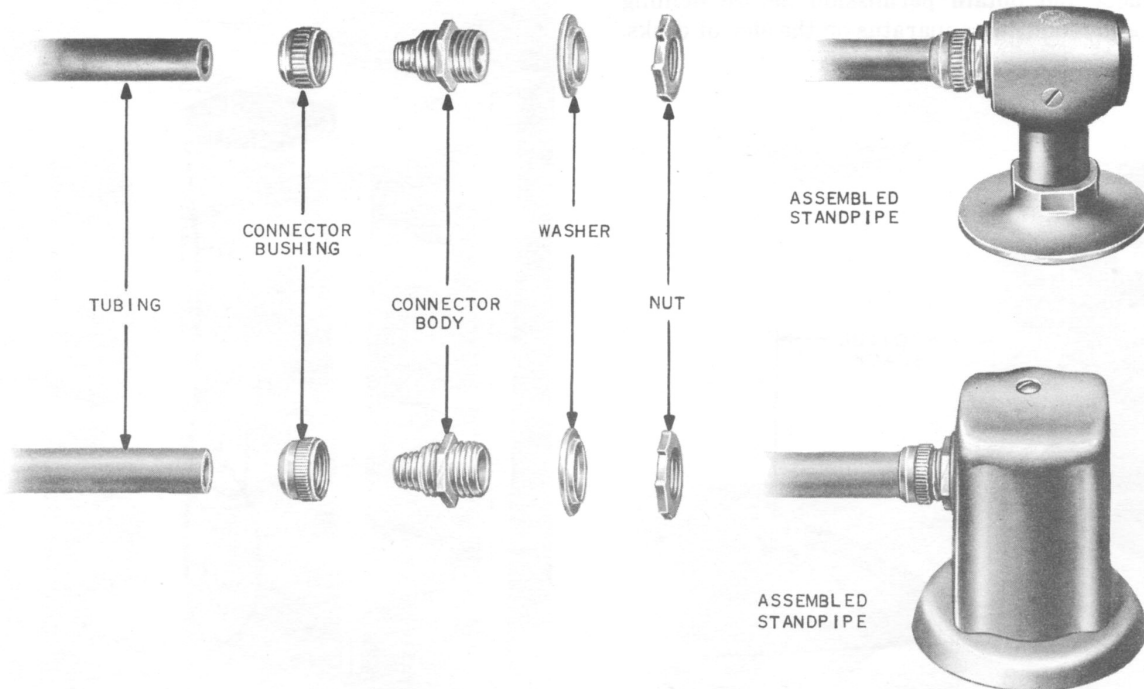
Assembly of B Station Tubing Fittings to Standpipes That Are Part of a Permanent Underfloor Duct or Conduit System
